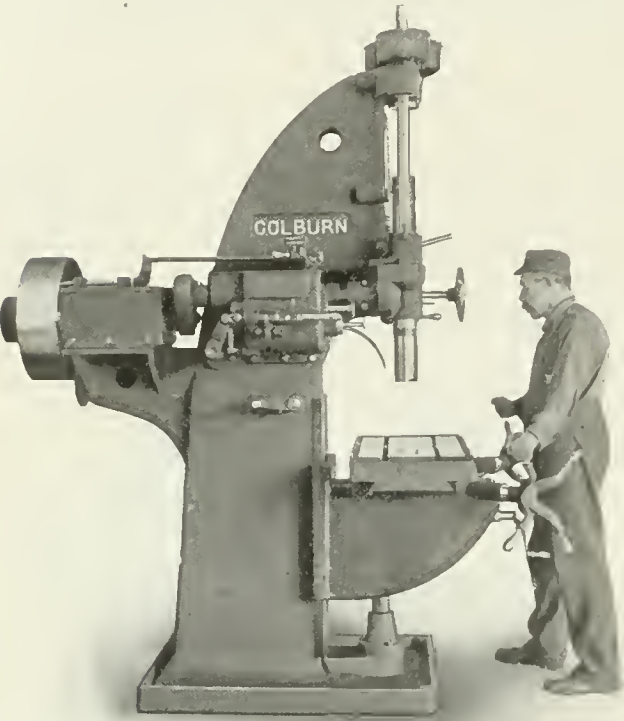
Colburn Heavy-duty Drill Press with Compound Table
